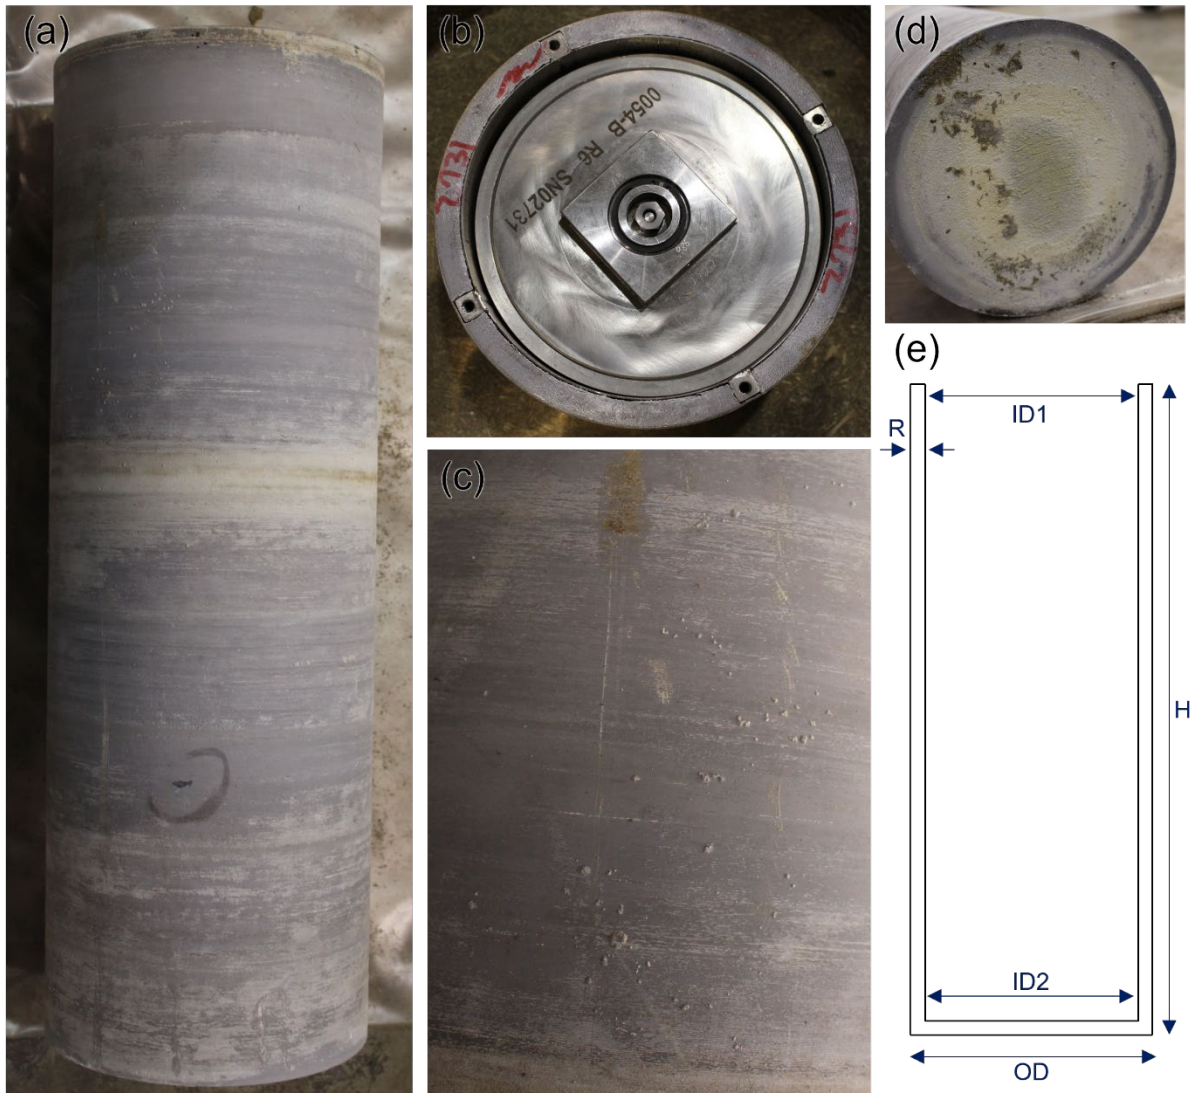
Pictures of (a) lead shield, (b) top of shield, (c) close-up of raised corrosion products, and (d) bottom of shield. (e) Drawing of lead shield and dimension labels.
